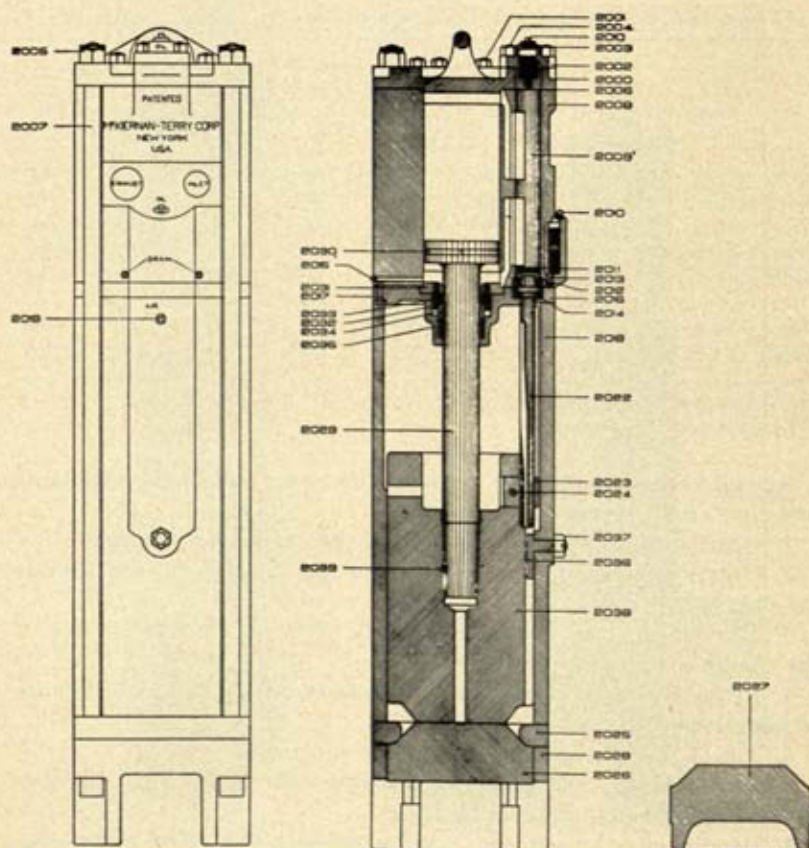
Section through a double-acting pile hammer. (McKiernan-Terry Corp.)
